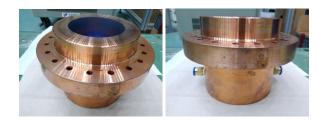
The structures of fabricated and assembled watercooled solid-target.
